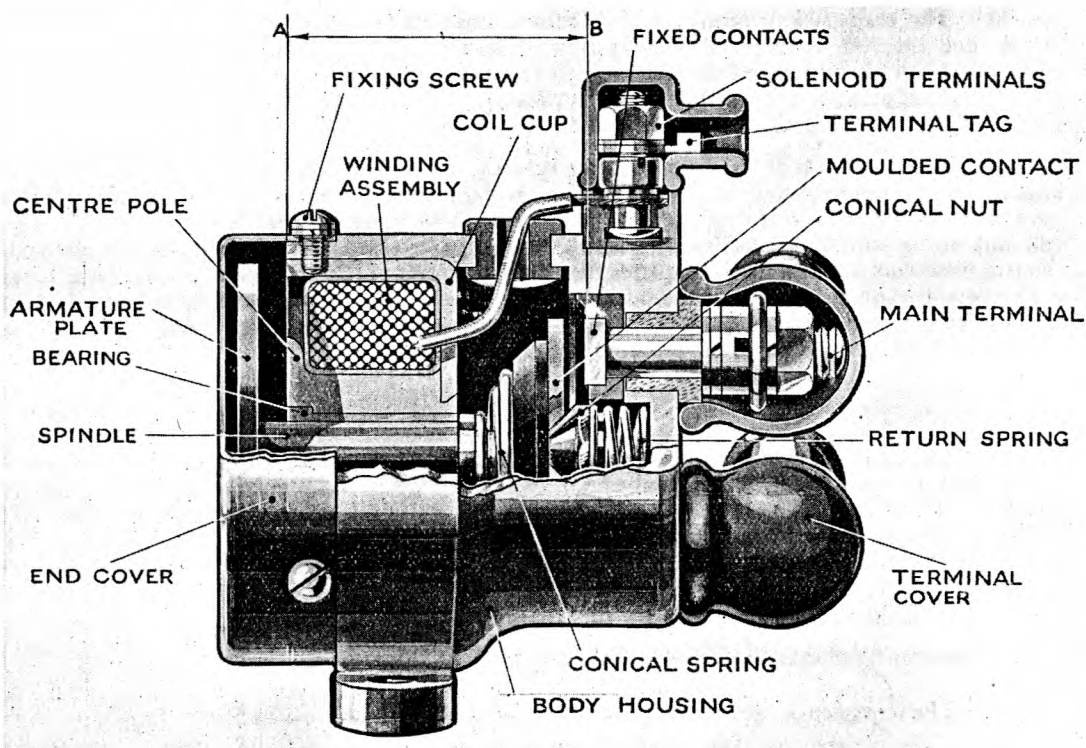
Sectional perspective of Rotax solenoid switch, type D.0213
